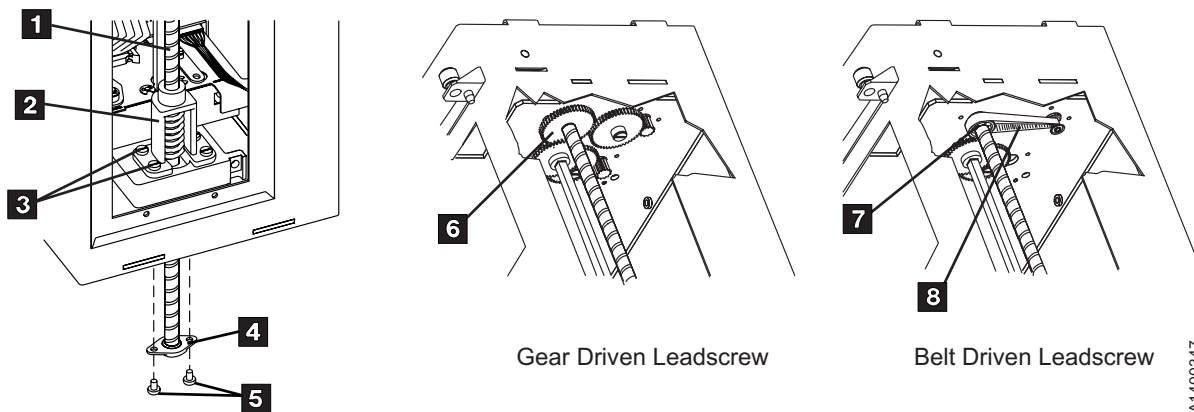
Gear-driven and Belt-driven Leadscrew
